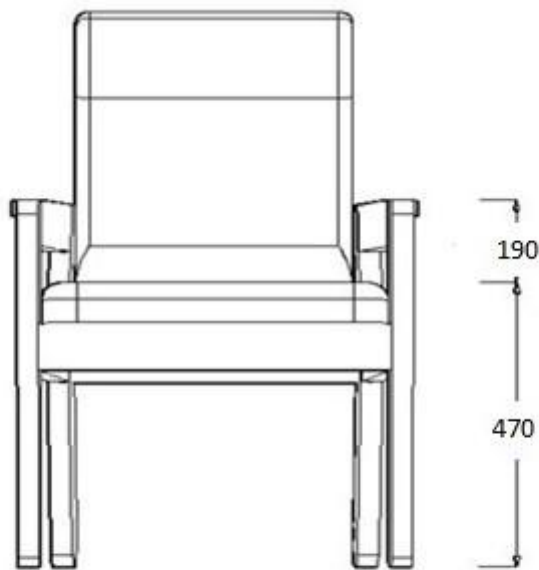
Illustration of the front view (in millimeters) of the new office chair to be produced for Kumasi Technical University administrative staff
